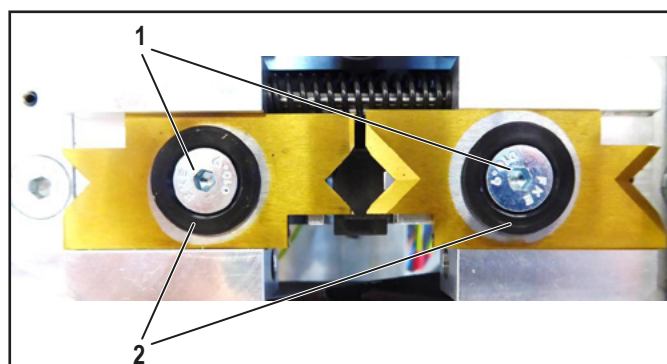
Stripping blades for the Power Stripper 6.0, Power Stripper 16
